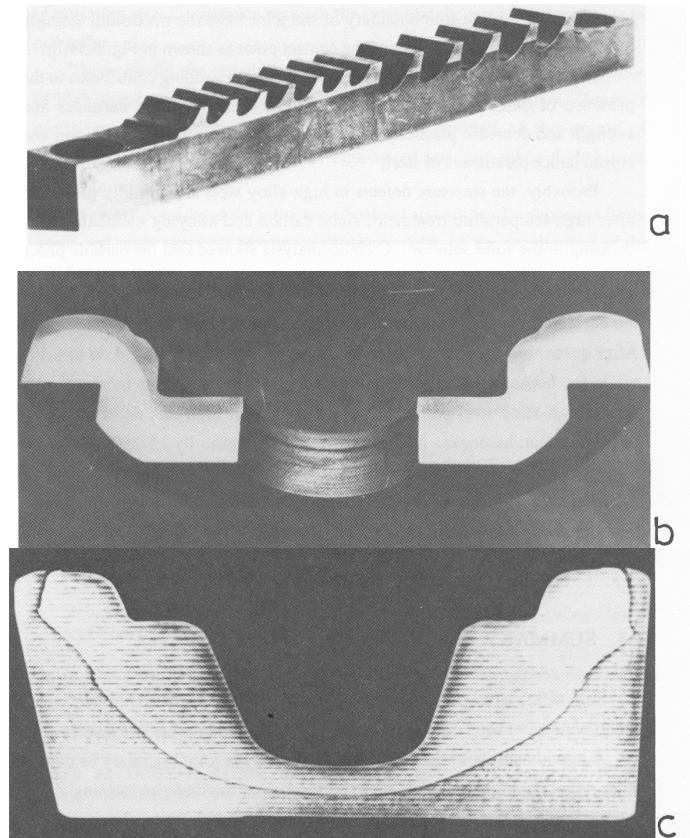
Bimetal tools: a) cutting tool broach, b) forging die insert, c) injection mould
